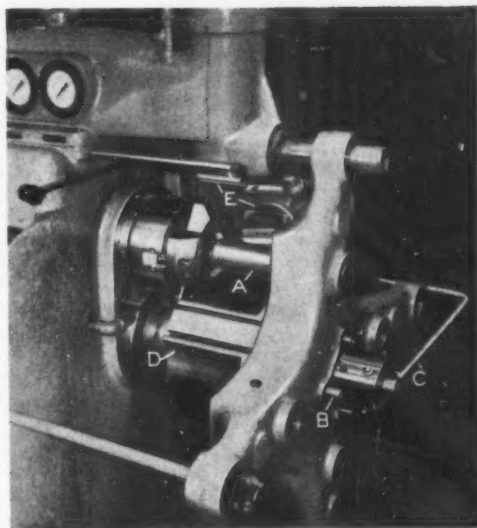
Close-up View of the Turret of One of the Monforts Chucking Automatics Set up for Operations on Gearbox Bearing Housings
